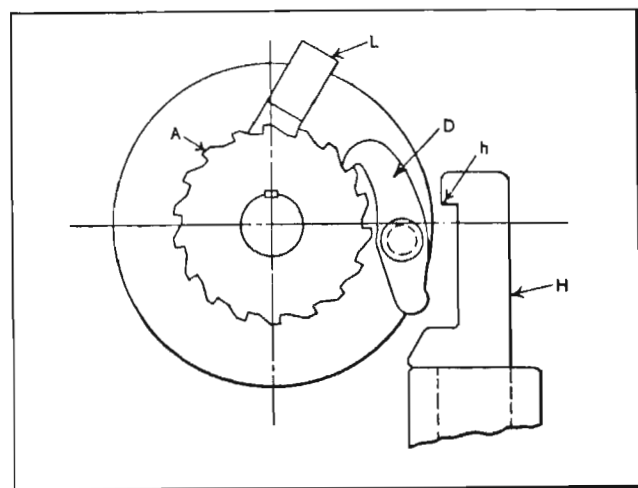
Position of Bar H after Being Released by Latch G, Fig. 9
